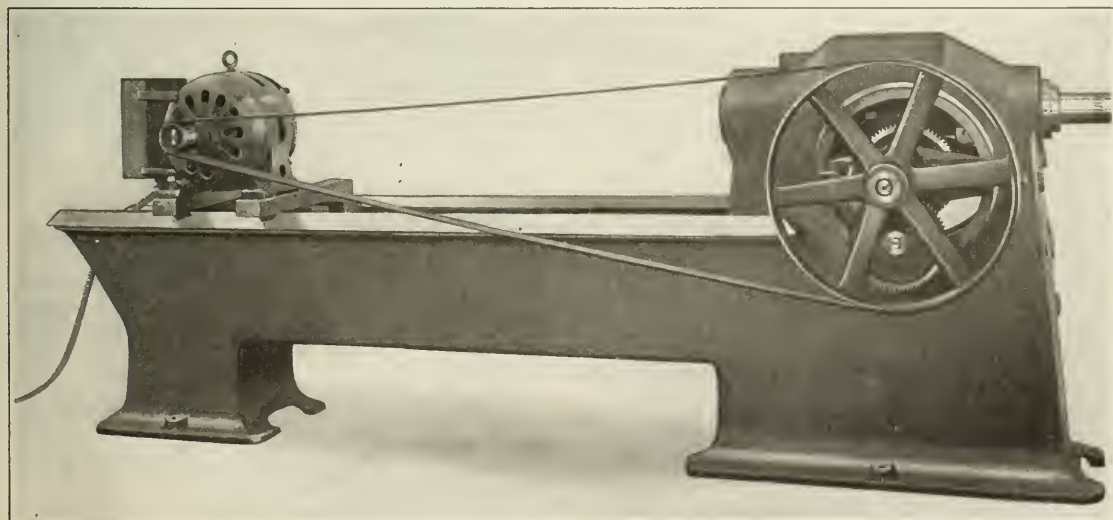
Portable Tool for boring and facing Bearings for Case containing Speed Change-gears—Bearings at Opposite Side of Head are bored and faced simultaneously
